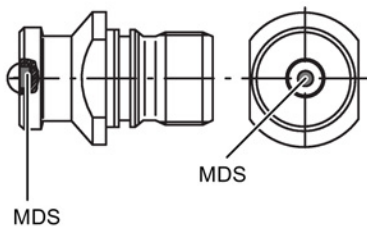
Installation example of MDS D421/D521/E623 in a stud bolt
